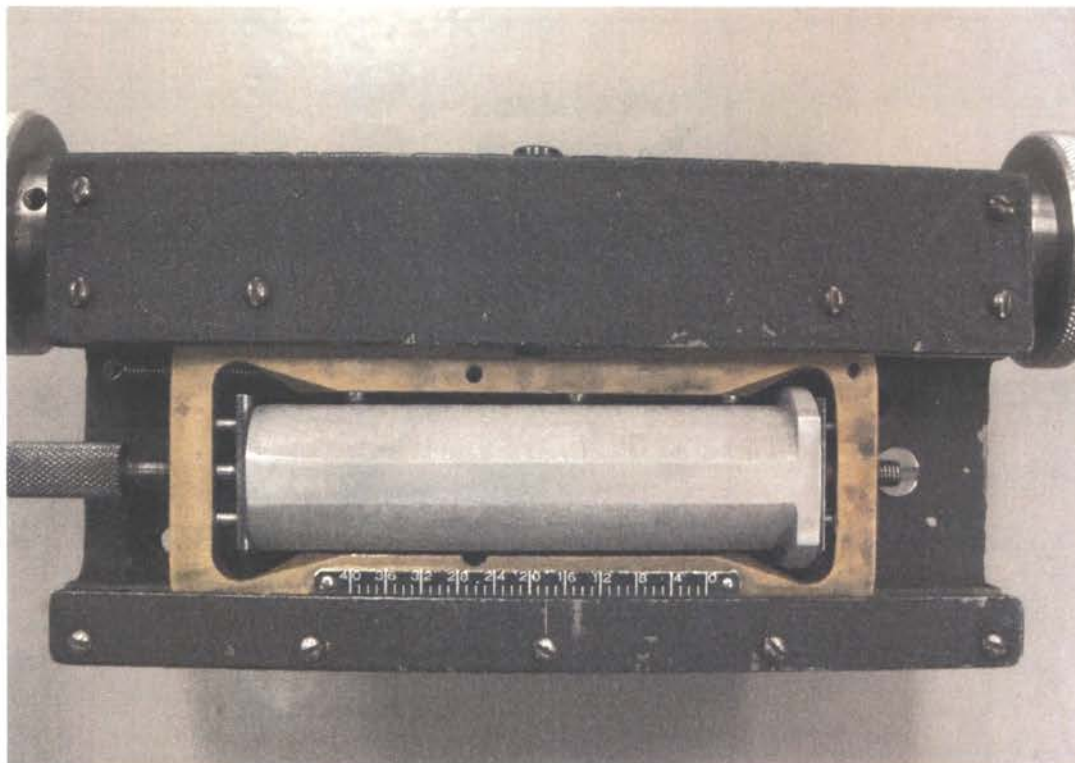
Second fixture used for hardness testing, with Jominy sample and indexing wheel for position change.
